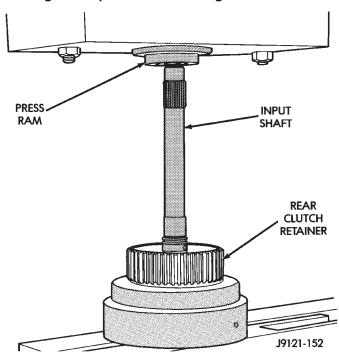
Pressing Input Shaft Into Rear Clutch Retainer
